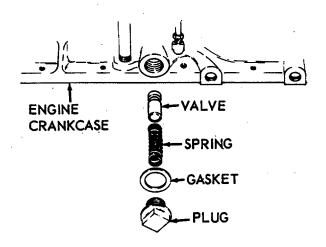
Oil filter assembly, removal, disassembly, reassembly, and installation.
